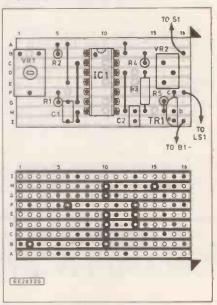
Stripboard component layout and details of breaks required in the underside copper tracks...
